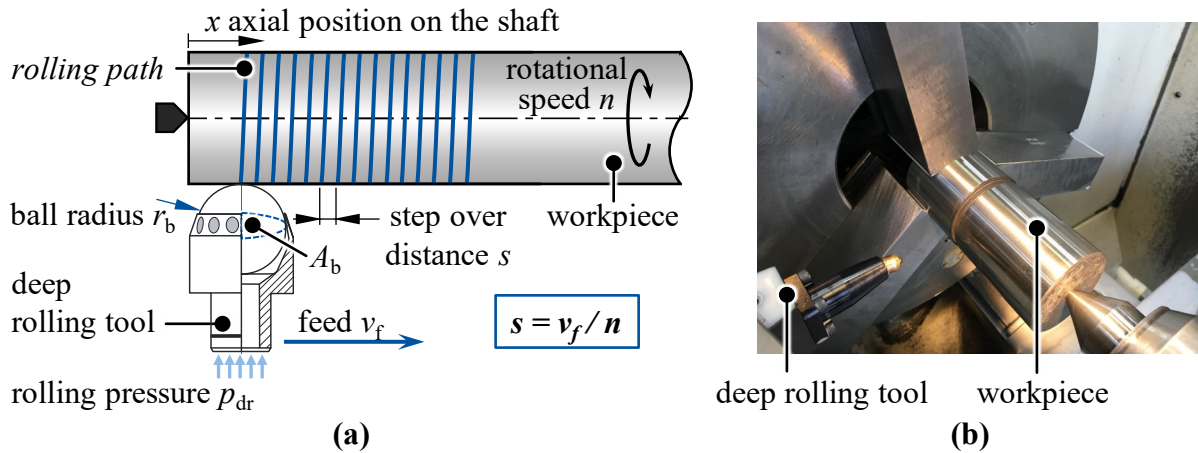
(a) Test setup including tool and workpiece and properties of the hydrodynamic deep rolling tool from the ECOROLL AG according to [9] and (b) Arrangement of tool and specimen in the lathe.
